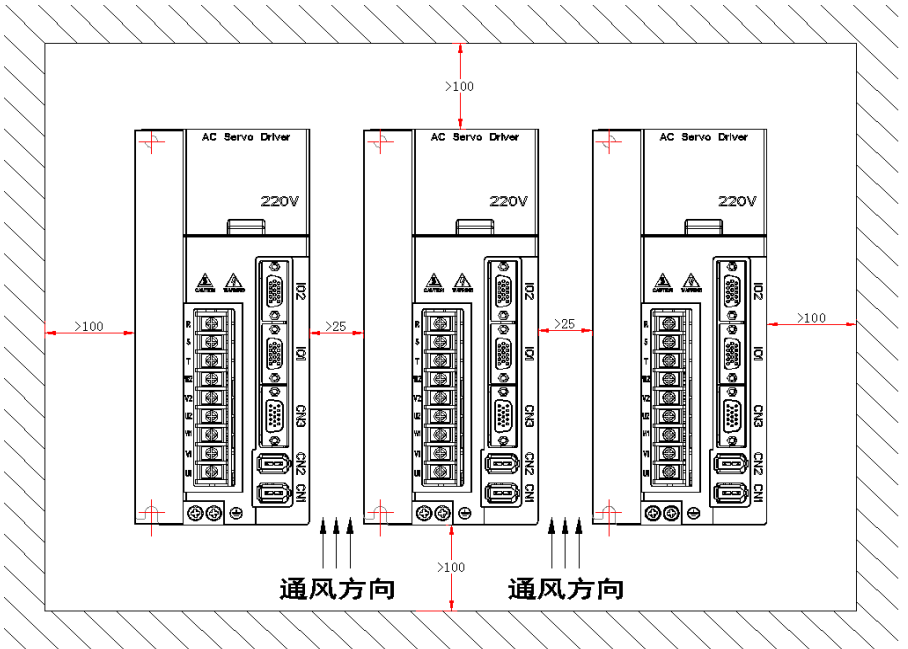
Multiple Servo Drive Installation Dimension Drawing
